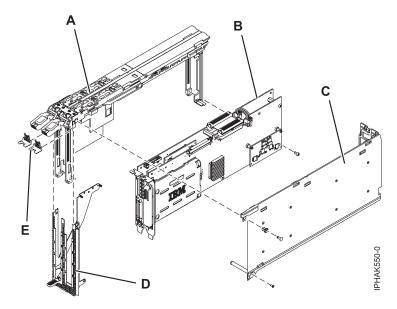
PCI-X double-wide, quad-channel Ultra320 SCSI RAID Controller and the main parts that make up the cassette assembly
